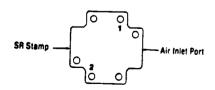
SOCKET-HEAD CAPSCREW LOCATIONS.
